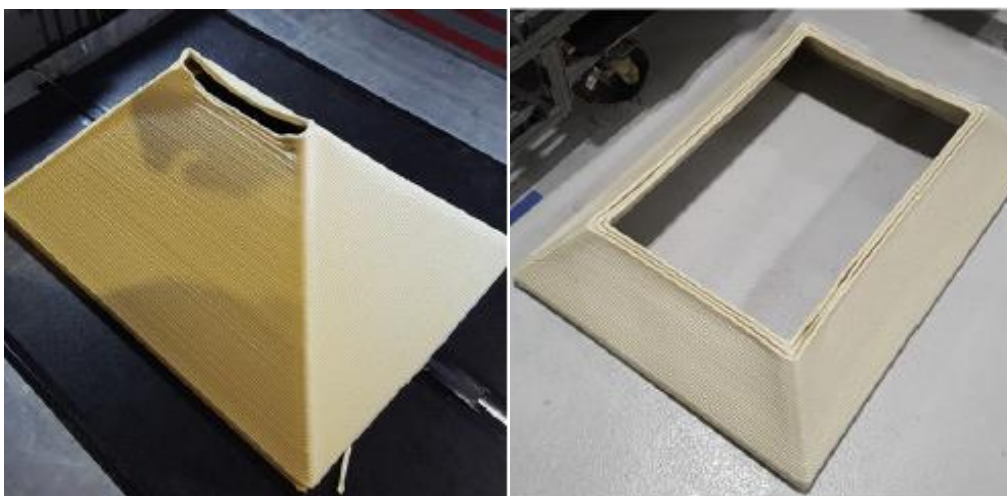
Print failure due to heat retention in two experiments: single bead wall(left); three beads wall (right) [43]
